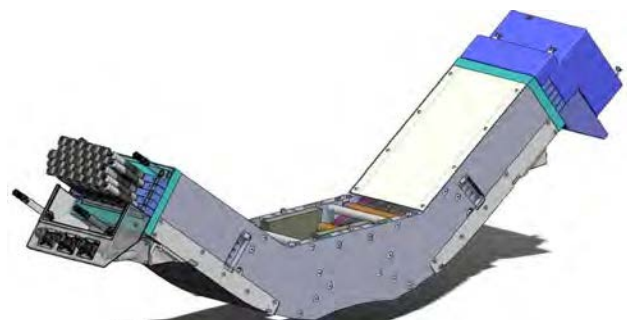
This CAD drawing of one of the collimators shows the motors extending from the left side (Source: Viewray)
